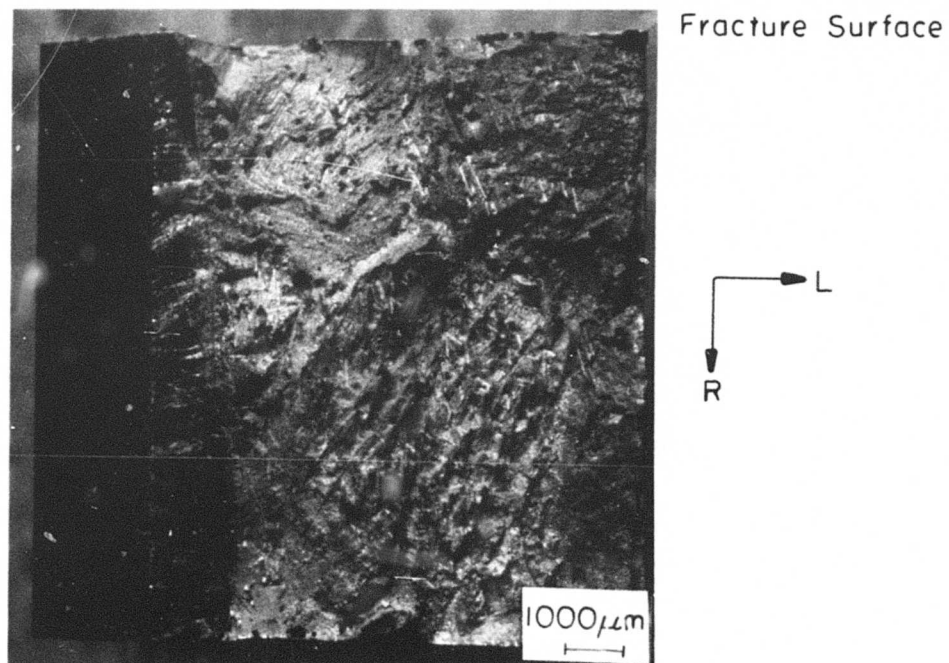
Alloy 227, sample 7SL2. Fracture surface X8.
